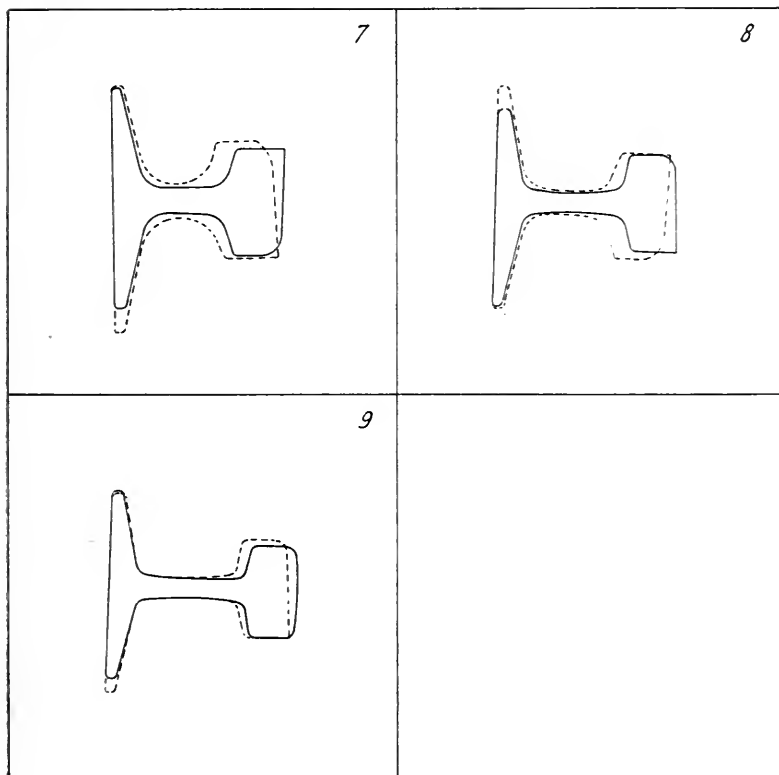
SHAPING PASSES 7, 8 AND 9.
